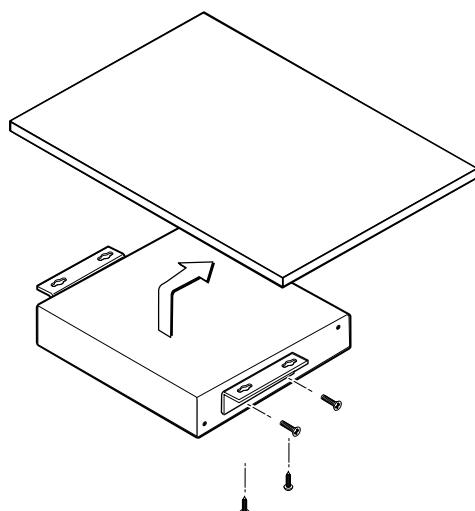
Mounting the MMX 32 VGA MTP Under Furniture
